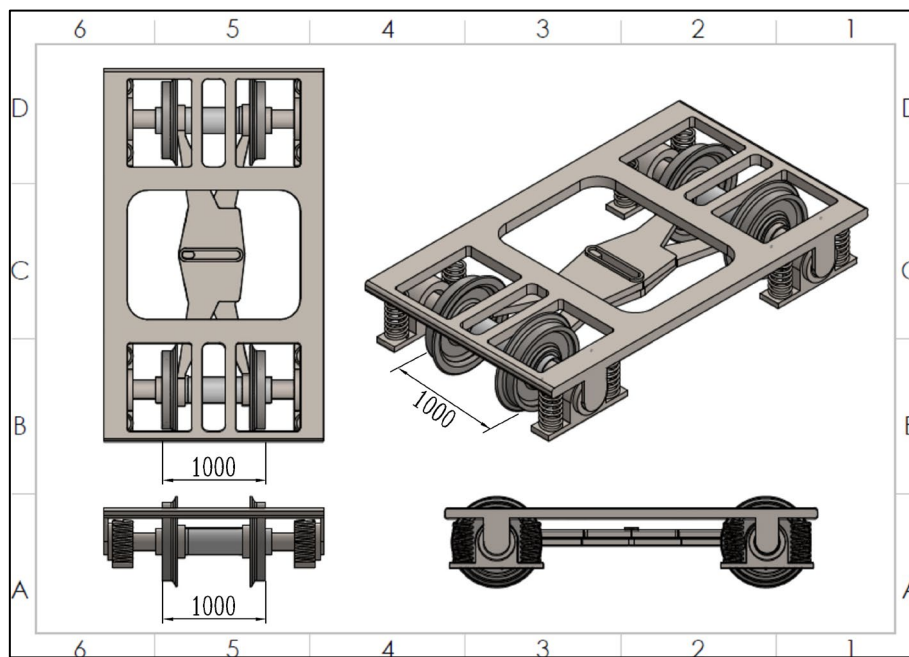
Complete setup of Gauge-Changing Bogie for Meter Gauge System
